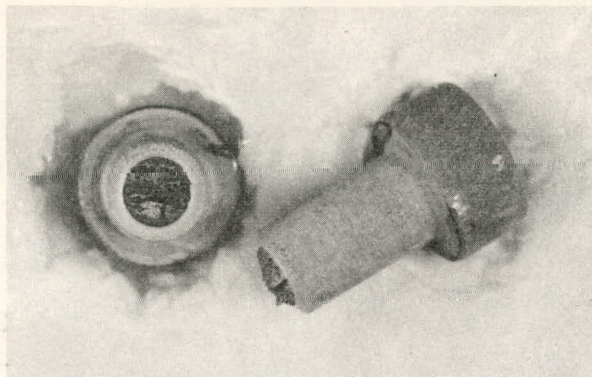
Fracture Surface of Notched 212-B Specimen D (Charge A Unirradiated); Stress-Rupture Test
